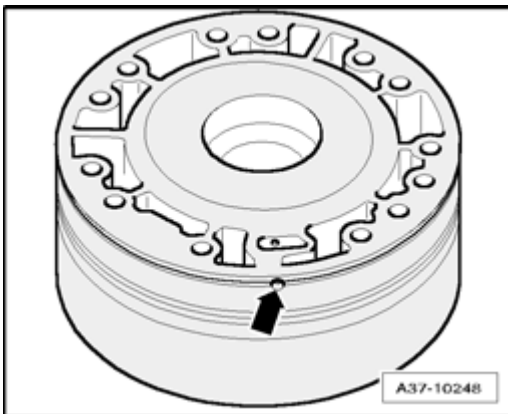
Checking Freedom Of Movement Of Valve Ball In Cylinder "F"
